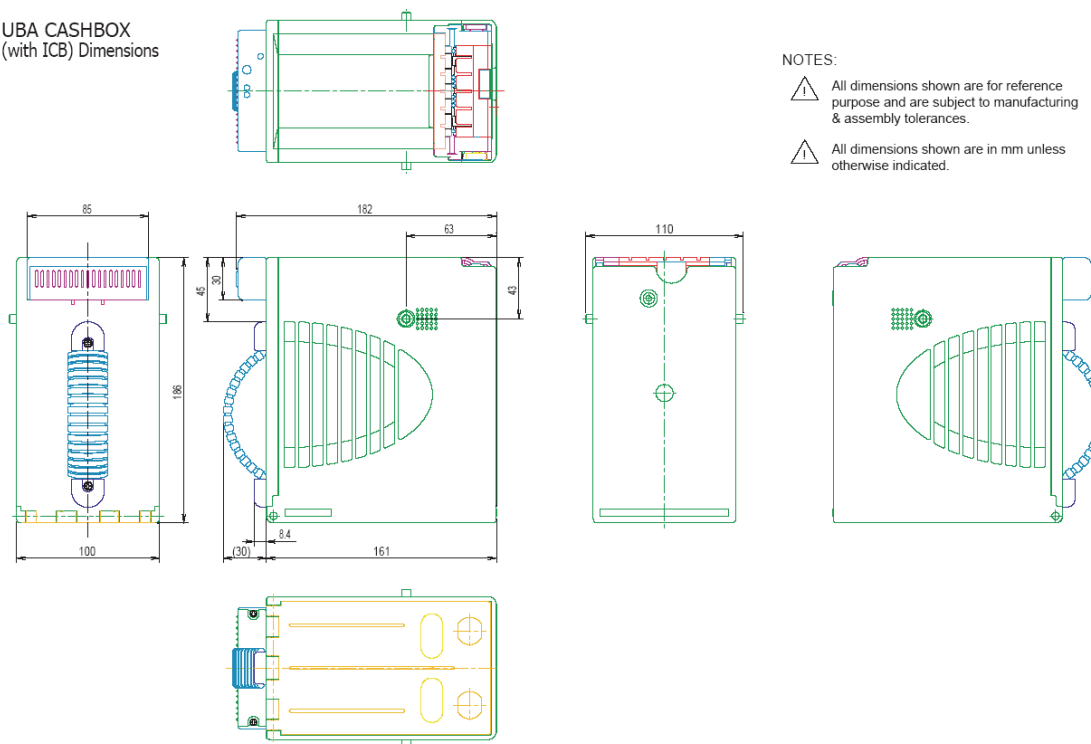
Bill Acceptor Standard Cash Box Dimensions Diagram
